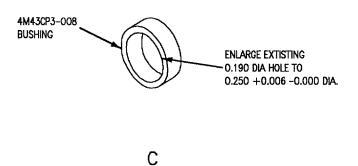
Windshield Center Attach Support Repair (Sheet 2)
